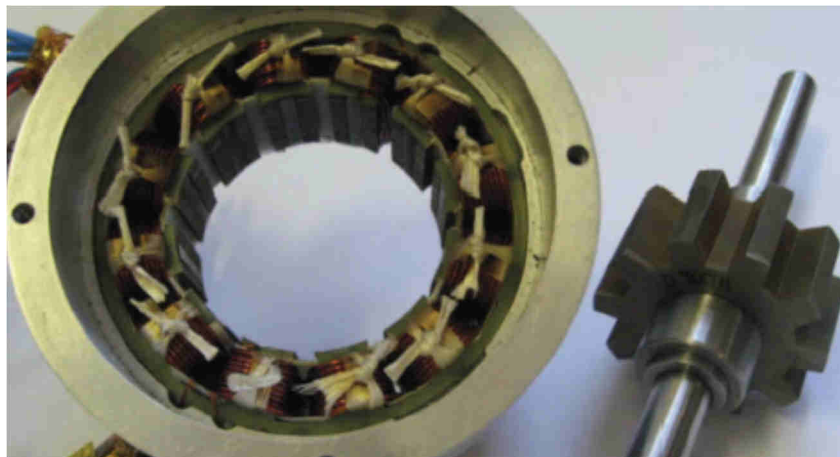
11. Prototype 12/10 stator/rotor poles brushless AC machine.
